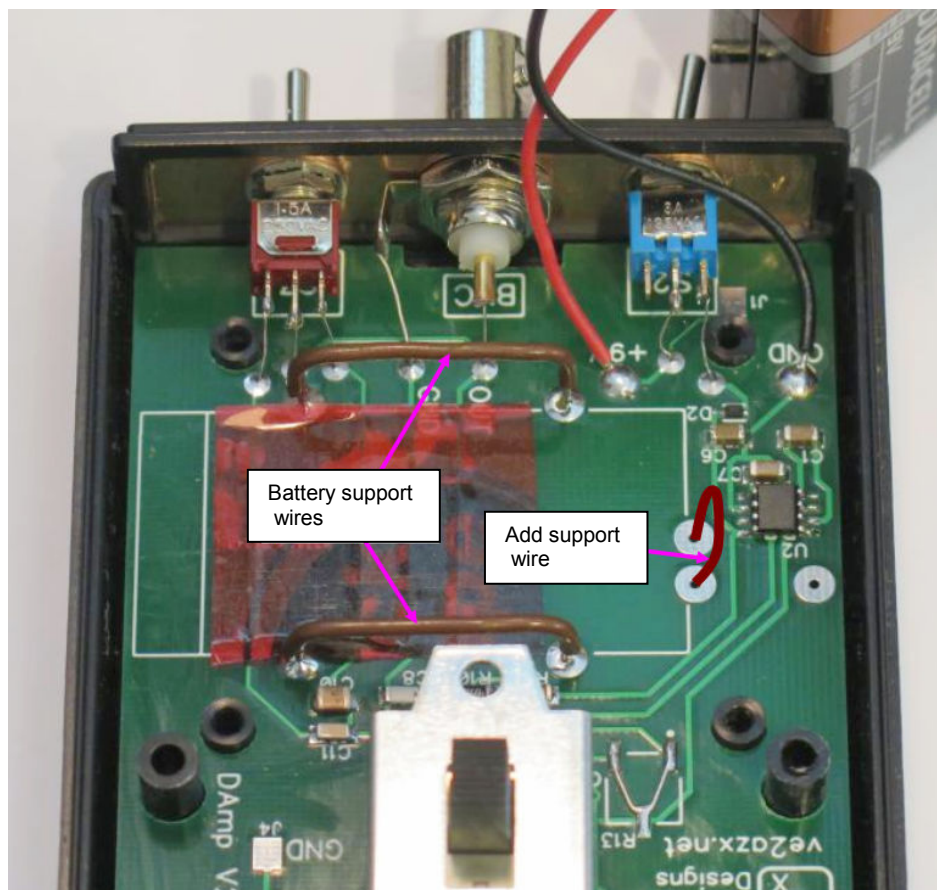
Installing the support wires and wiring the switches and BNC connector.
